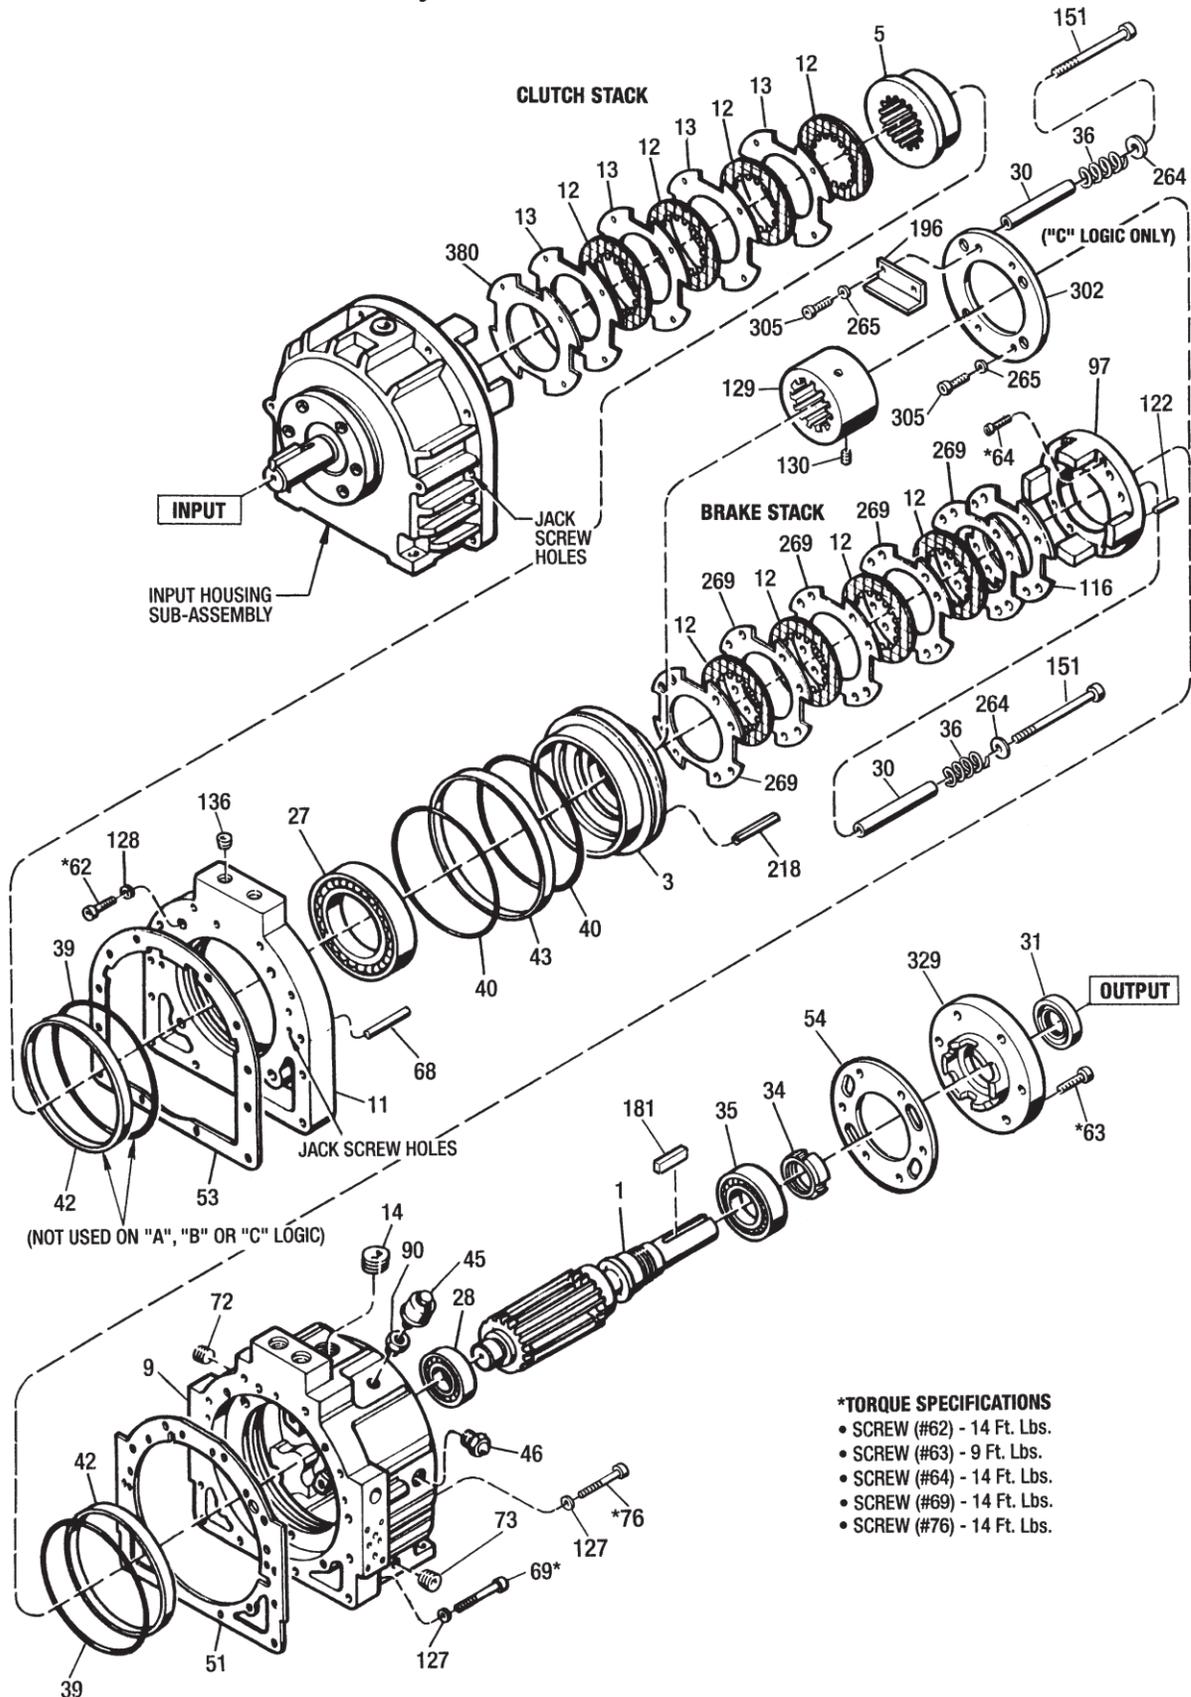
EH-2.5 Posidyne Clutch/Brake Assembly
